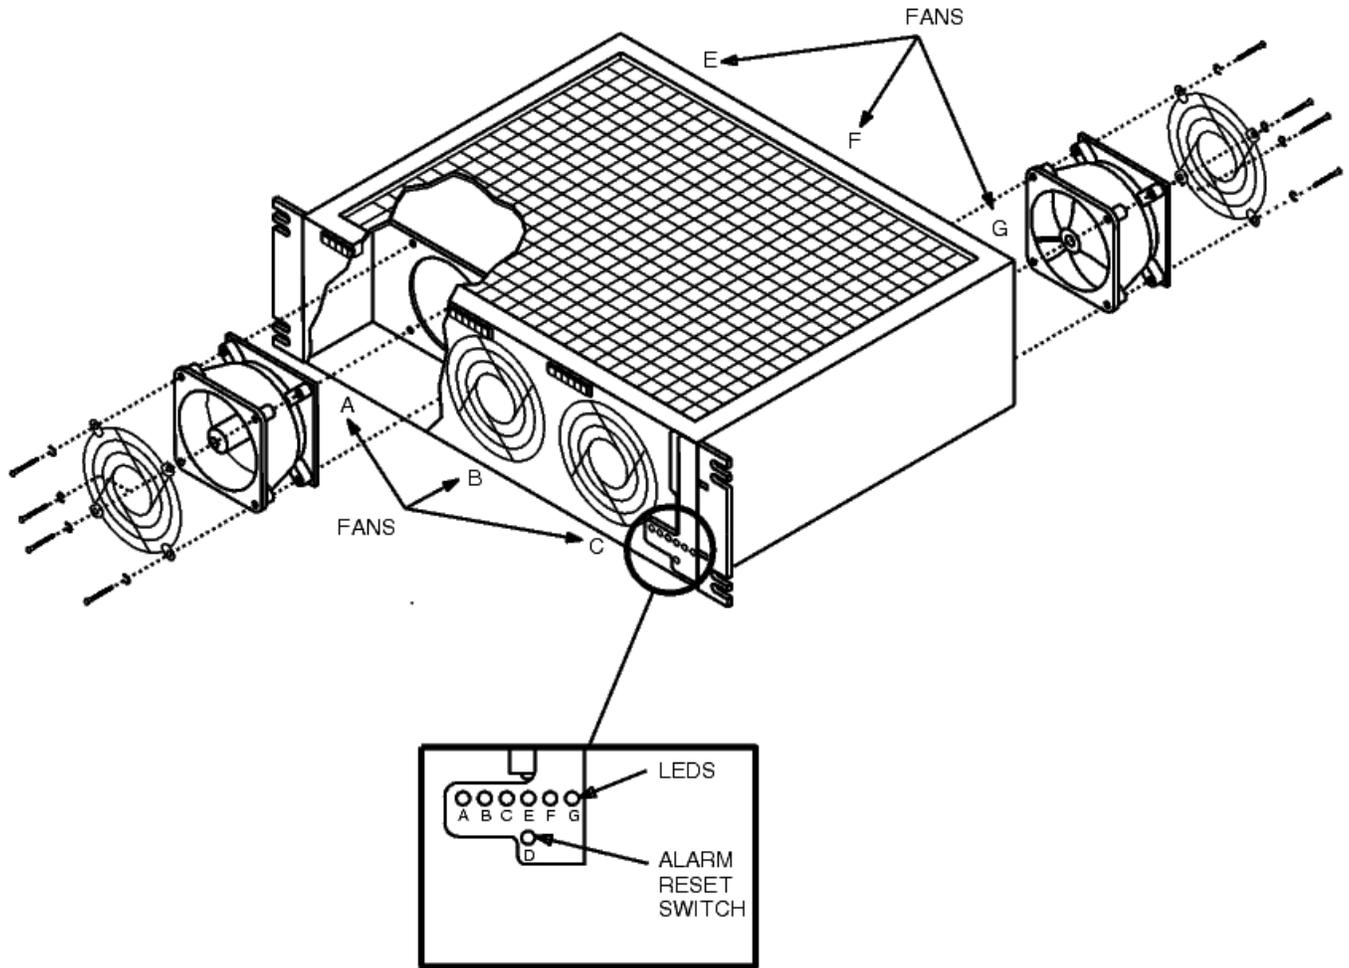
Fan Assembly (6 Fans) - J5D003BN-X (1-2)
